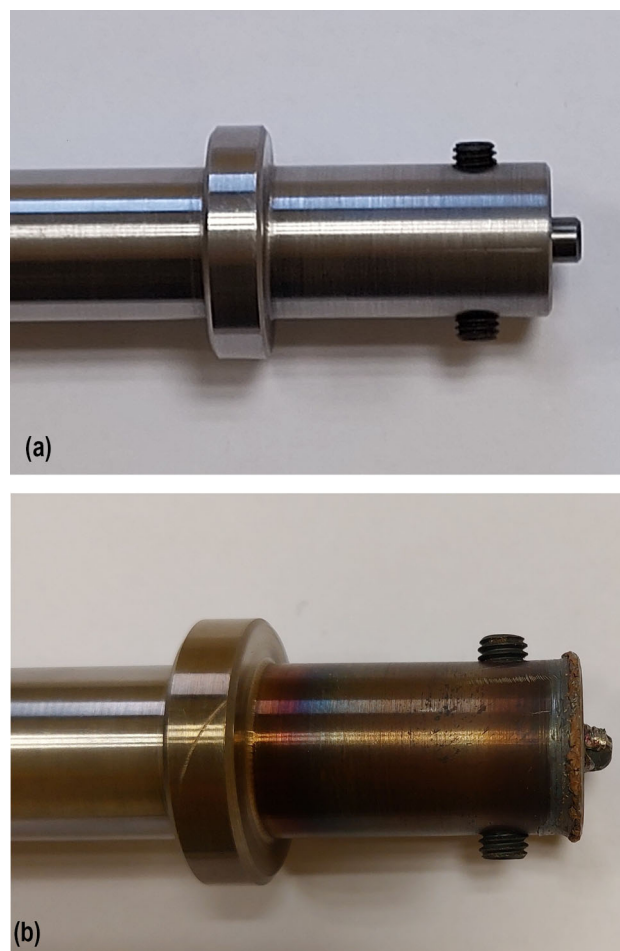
The welding tool: (a) new (b) worn out
